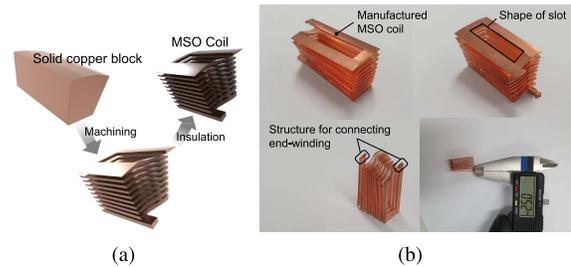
MSO coil for high fill factor. (a) Manufacturing process of the MSO coil. (b) Manufactured MSO coil for the specimen.
